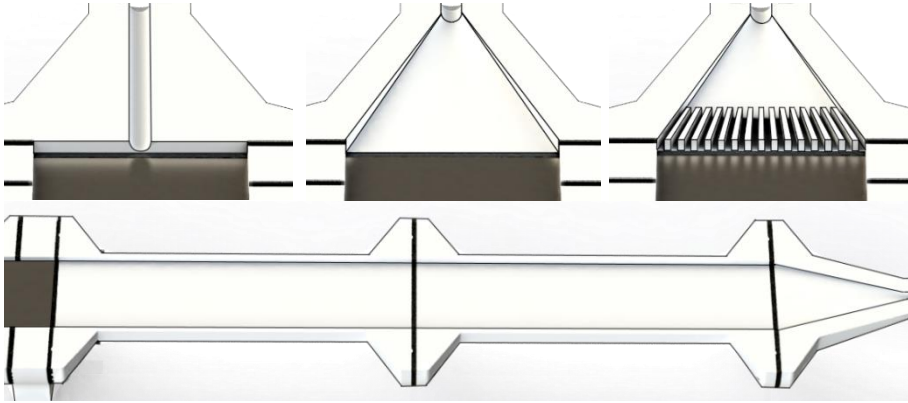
Rendered cutout images of the inlet configurations of the 3D printed electrolyzer. Top left: tube inlet, top middle: conic inlet, top right: divider inlet, bottom: extended conic configuration. The black stripes are the rubber gaskets between different printed components. For the top three configurations, photographs can be found in previous work.
